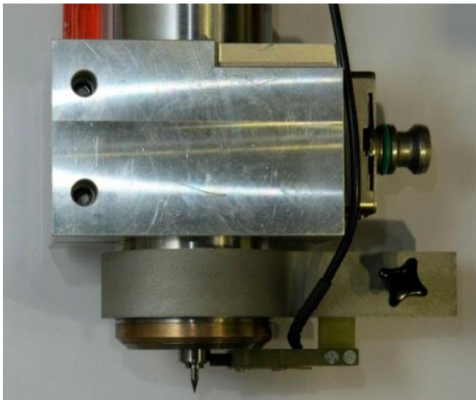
Integrated micro-EDM and micro-milling machining platform.
